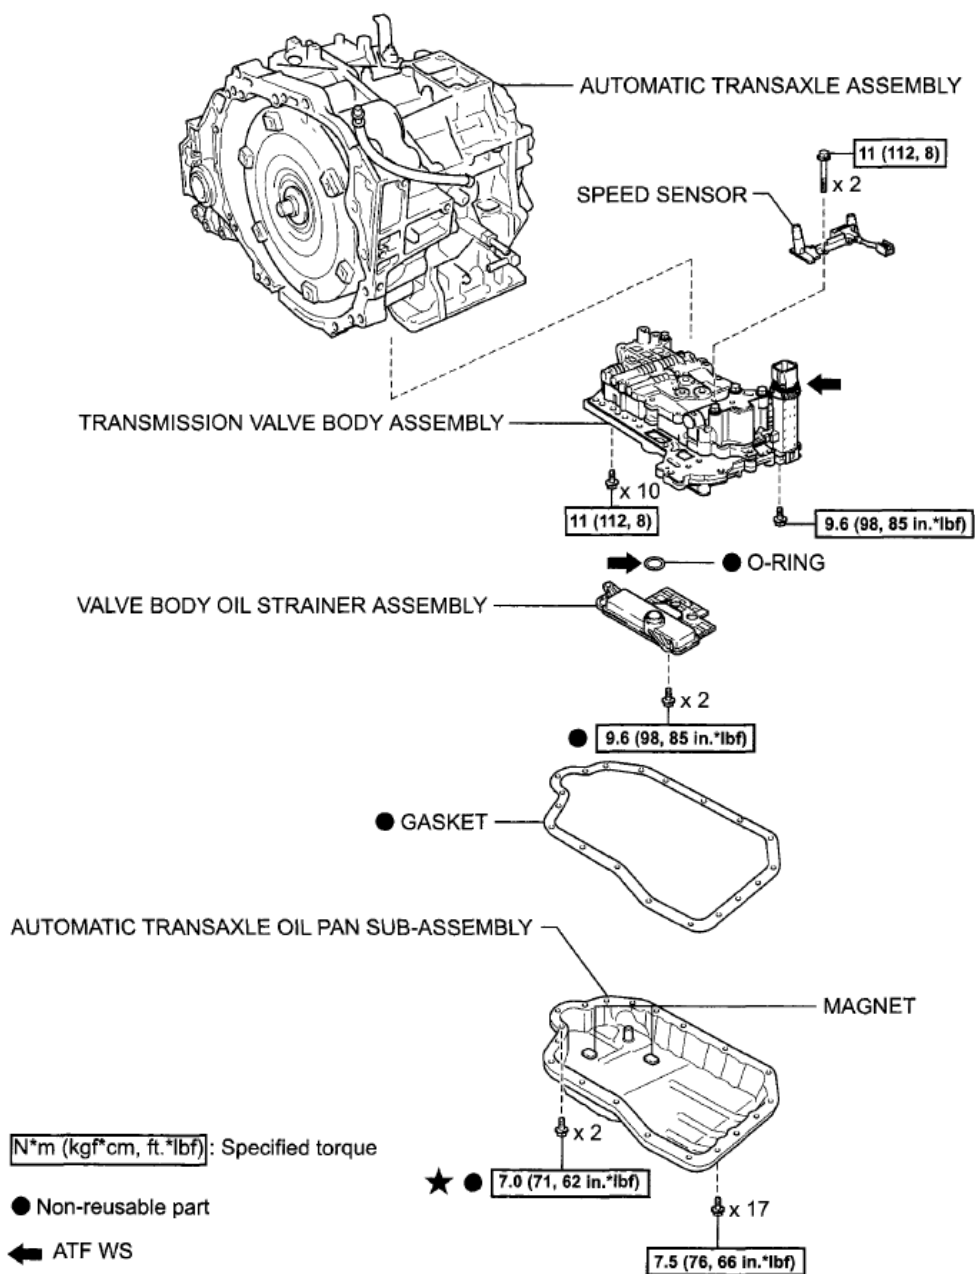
Identifying Automatic Transaxle Assembly And Components With Torque Specification
